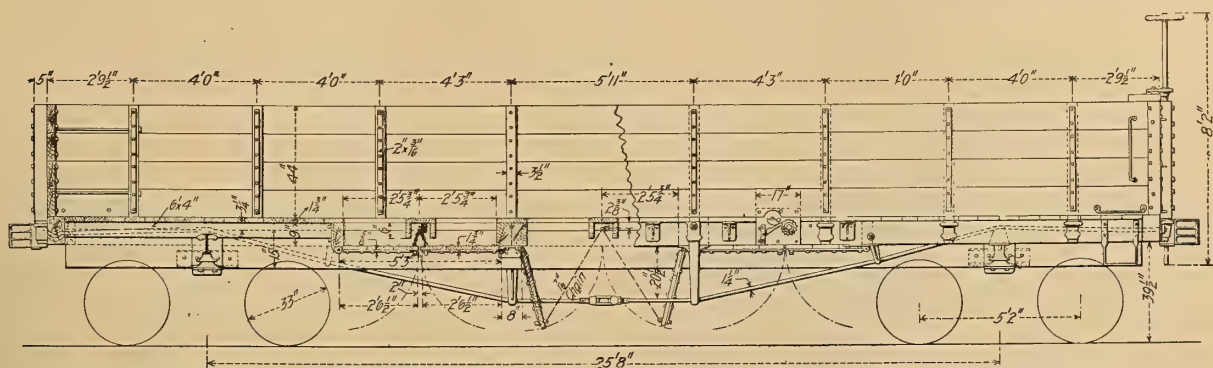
HALF SIDE ELEVATION AND SECTION, TRIPLE DROP BOTTOM GONDOLA CAR, STEEL CHANNEL CENTER SILLS, A., T. & S. F. CAPACITY, 80,000 LBS.
